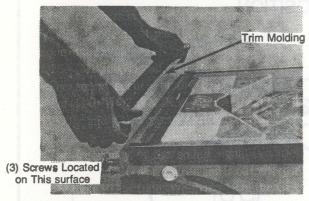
Removing the trim molding to gain access to the playfield. Take out the three screws as indicated to remove the molding.
